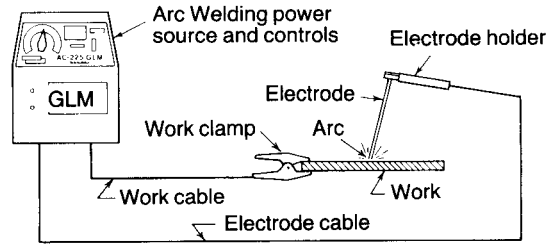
The welding circuit for shielded metal arc welding.
